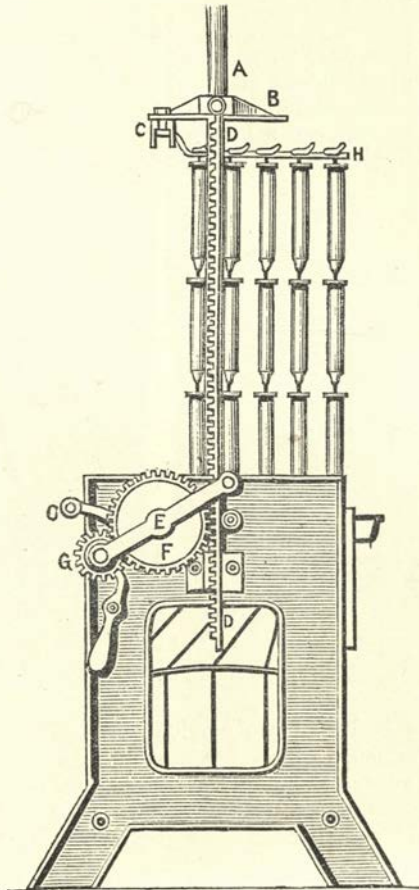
Royan's Continuous Wick Moulding Machine.
